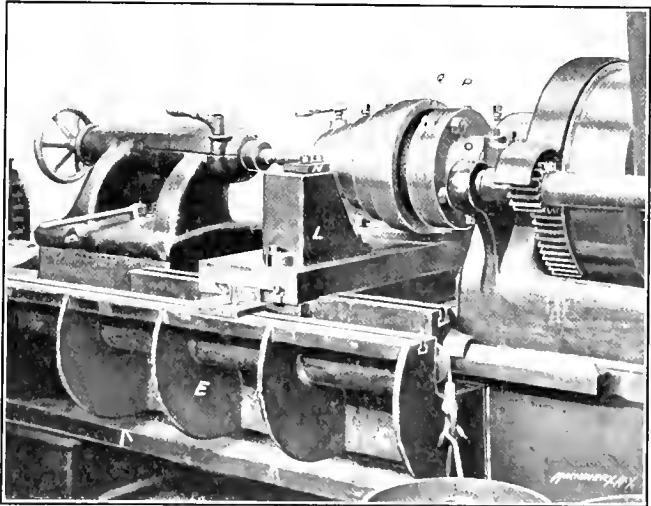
Rear View of Carriage, showing Form Tool Holder and Form Copying Mechanism.
